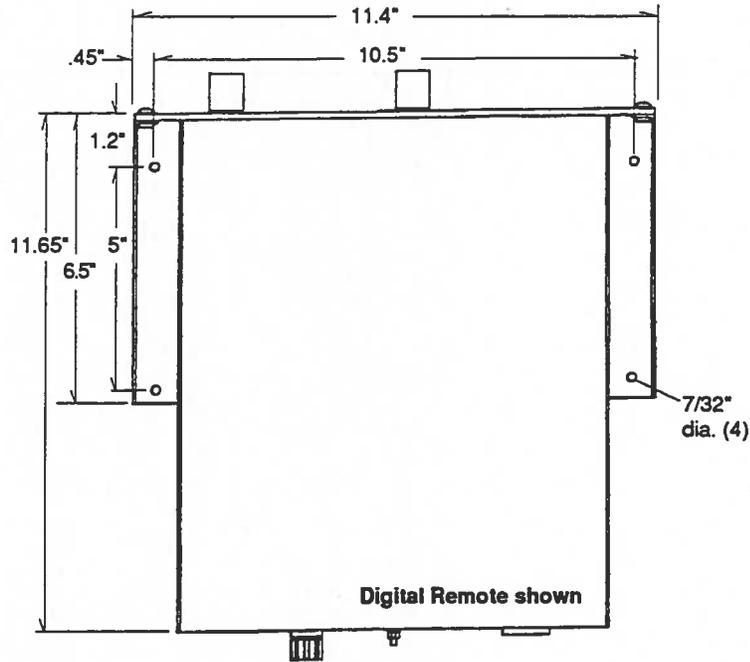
Mounting Dimensions - Remote V/C Modules
